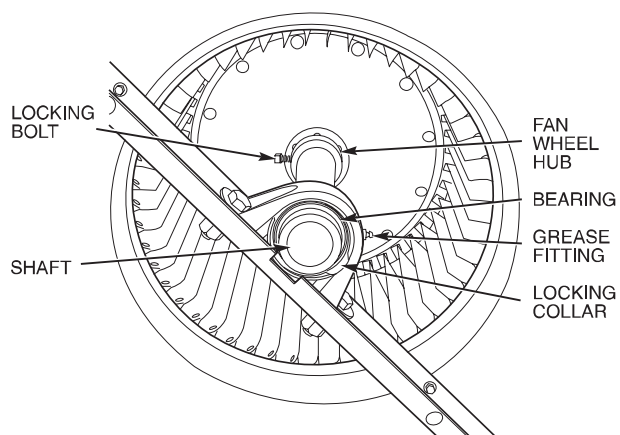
Fan Shaft, Bearings, and Fan Wheel (Typical)
